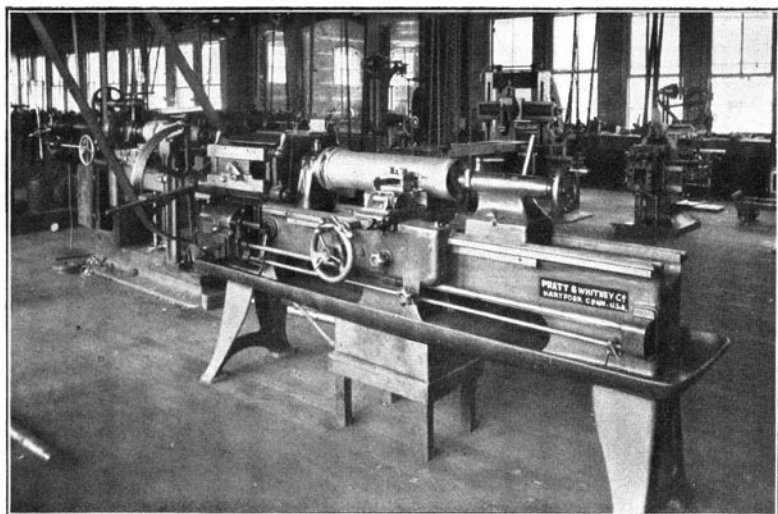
LATHE USED IN TESTS WITH HIGH-SPEED TOOL STEELS
